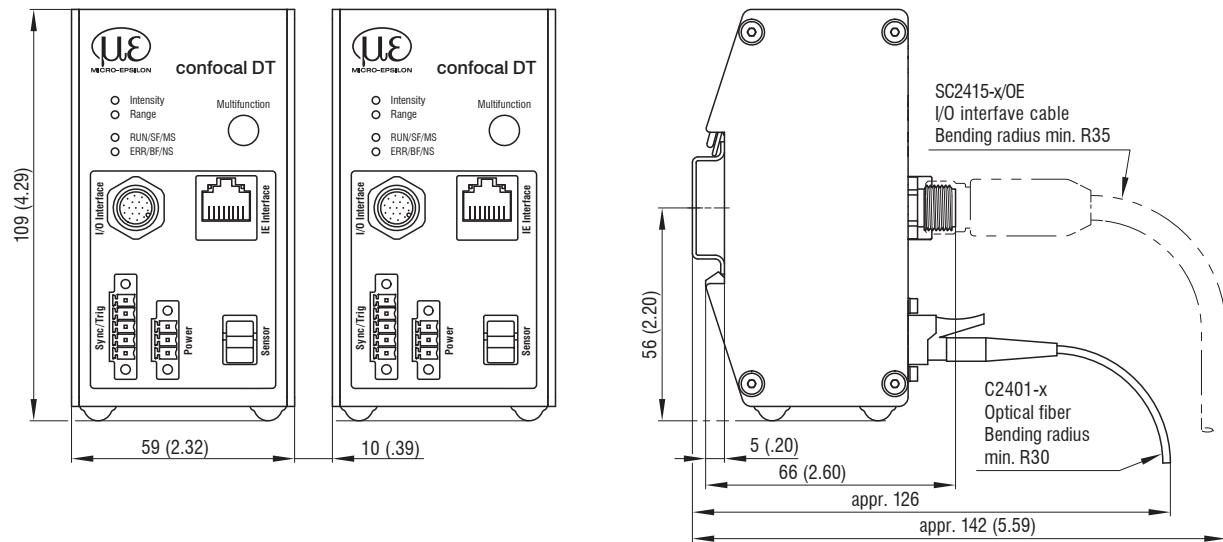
IFC2411 dimensional drawing, dimensions in mm
